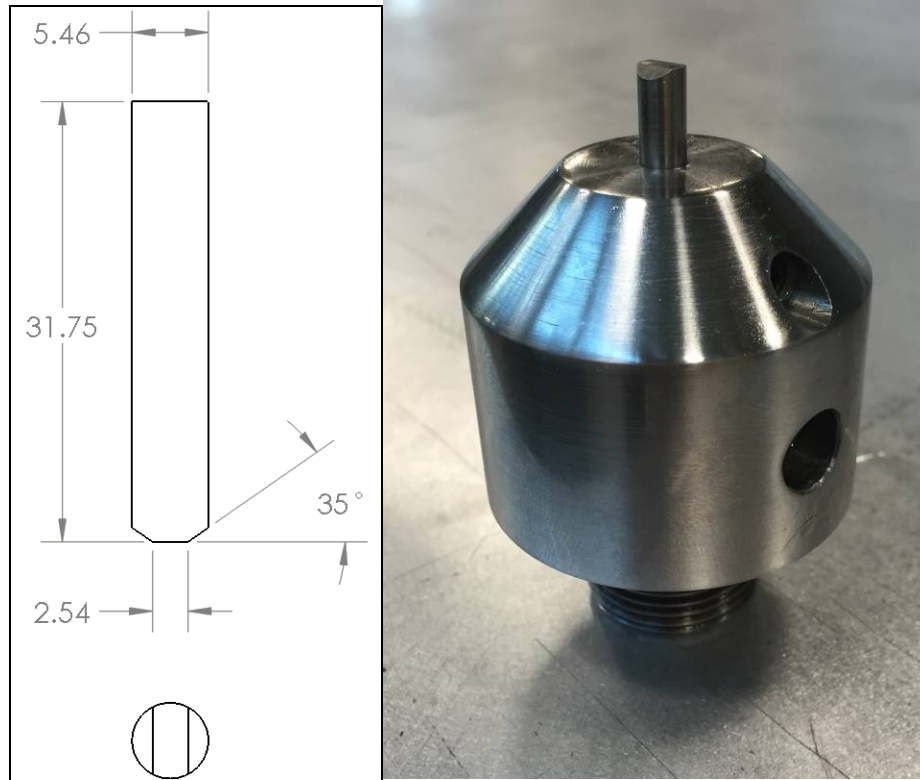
(Left) Loading nose dimensions in millimeters. (Right) Image of loading nose installed in adapter for connection to loading frame.
